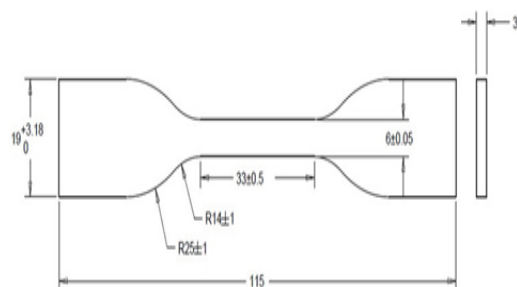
Dimension of tensile test specimen as per ASTM standard
